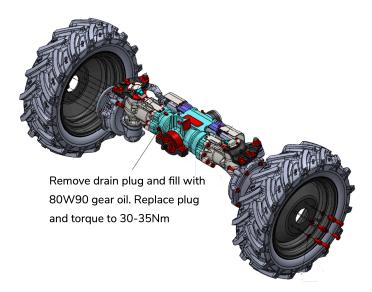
FRONT AXLE DRAIN PLUG LOCATION
